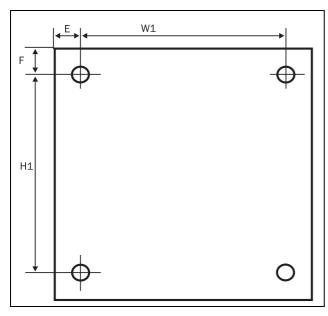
Hole pattern for screw attachment, MSF-310 to MSF-835. Hole distance (mm).
